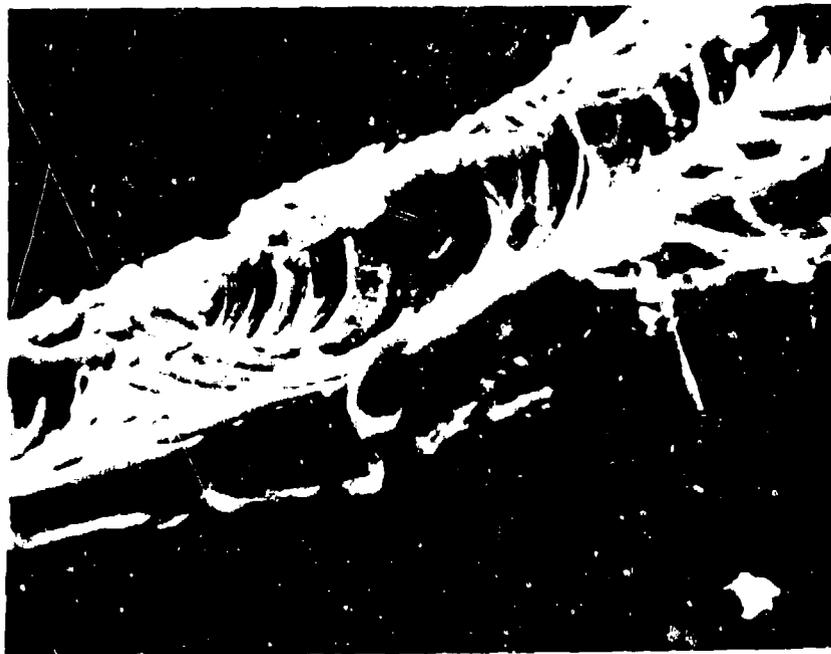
Slit Edge of Aluminum Foil Cut by Guillotine
